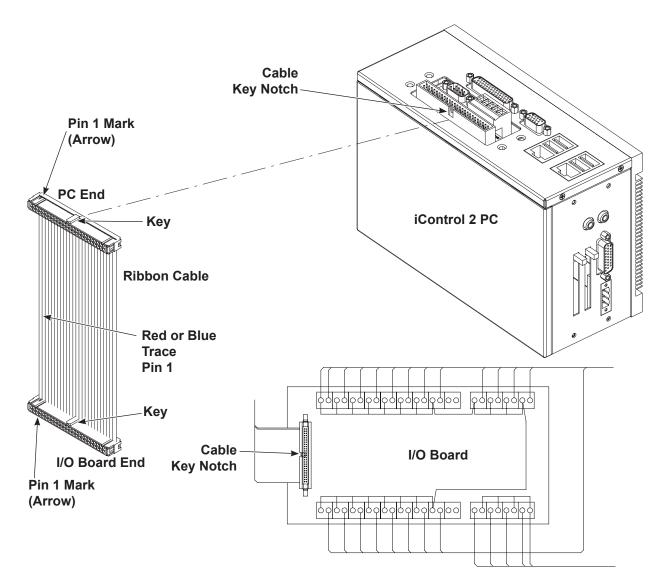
PC-I/O Board Ribbon Cable Connections
